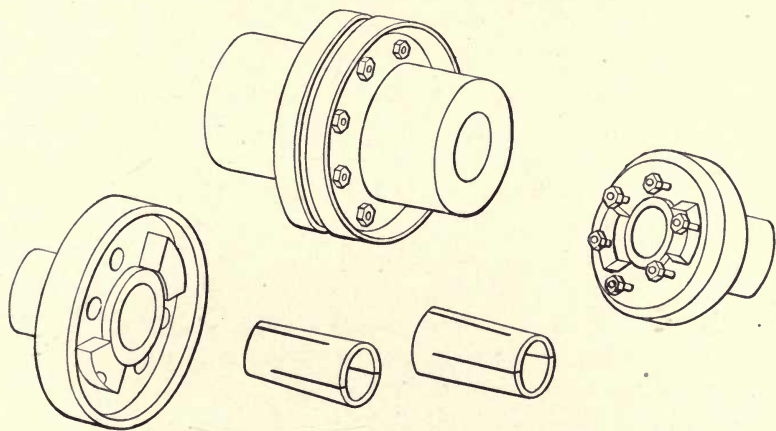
THE HENDERSHOT IMPROVED FLANGE COUPLING.
